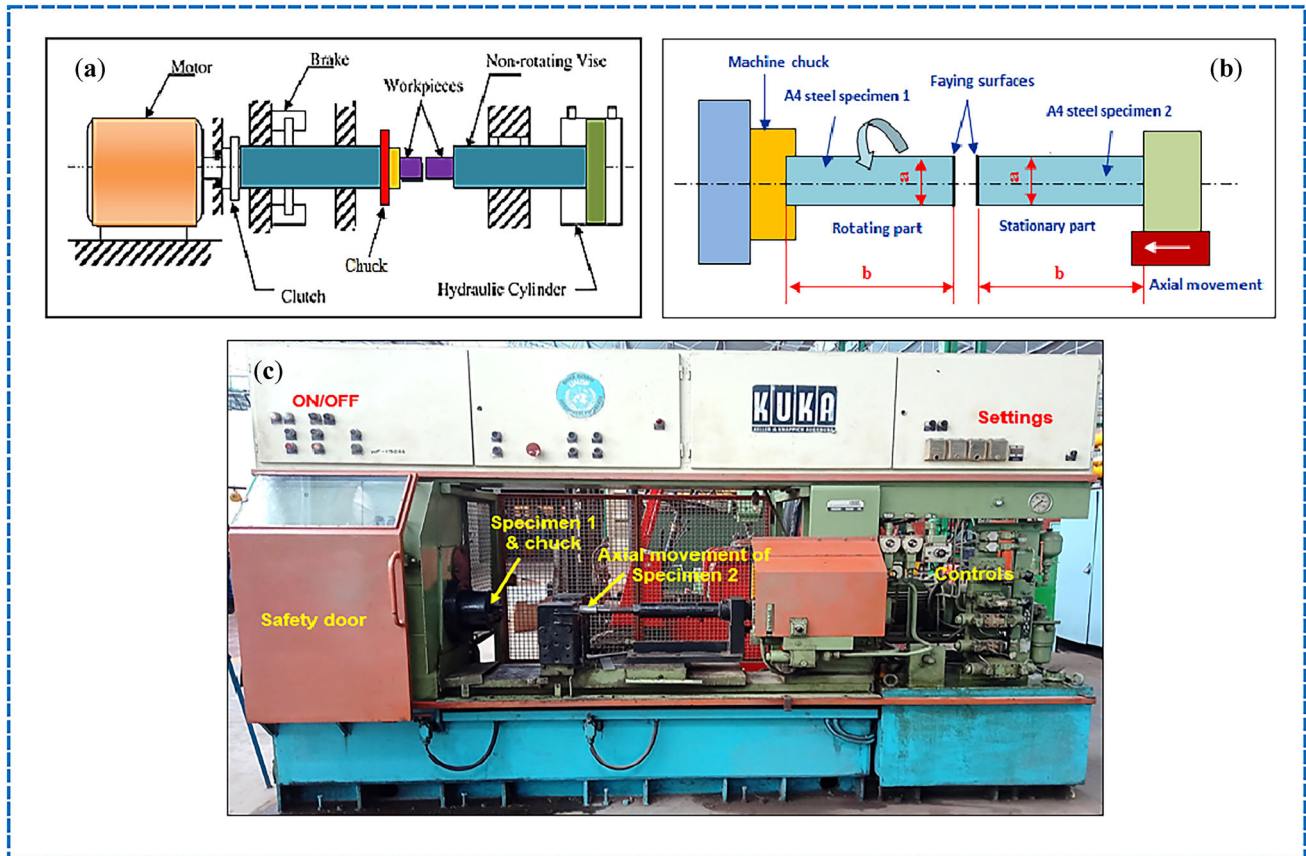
(a) Schematic diagram of friction welding set-up [5], (b) welding concept used in this study with $a = \phi 12$ mm, $b = 100$ mm specimens and (c) FW machine used.
